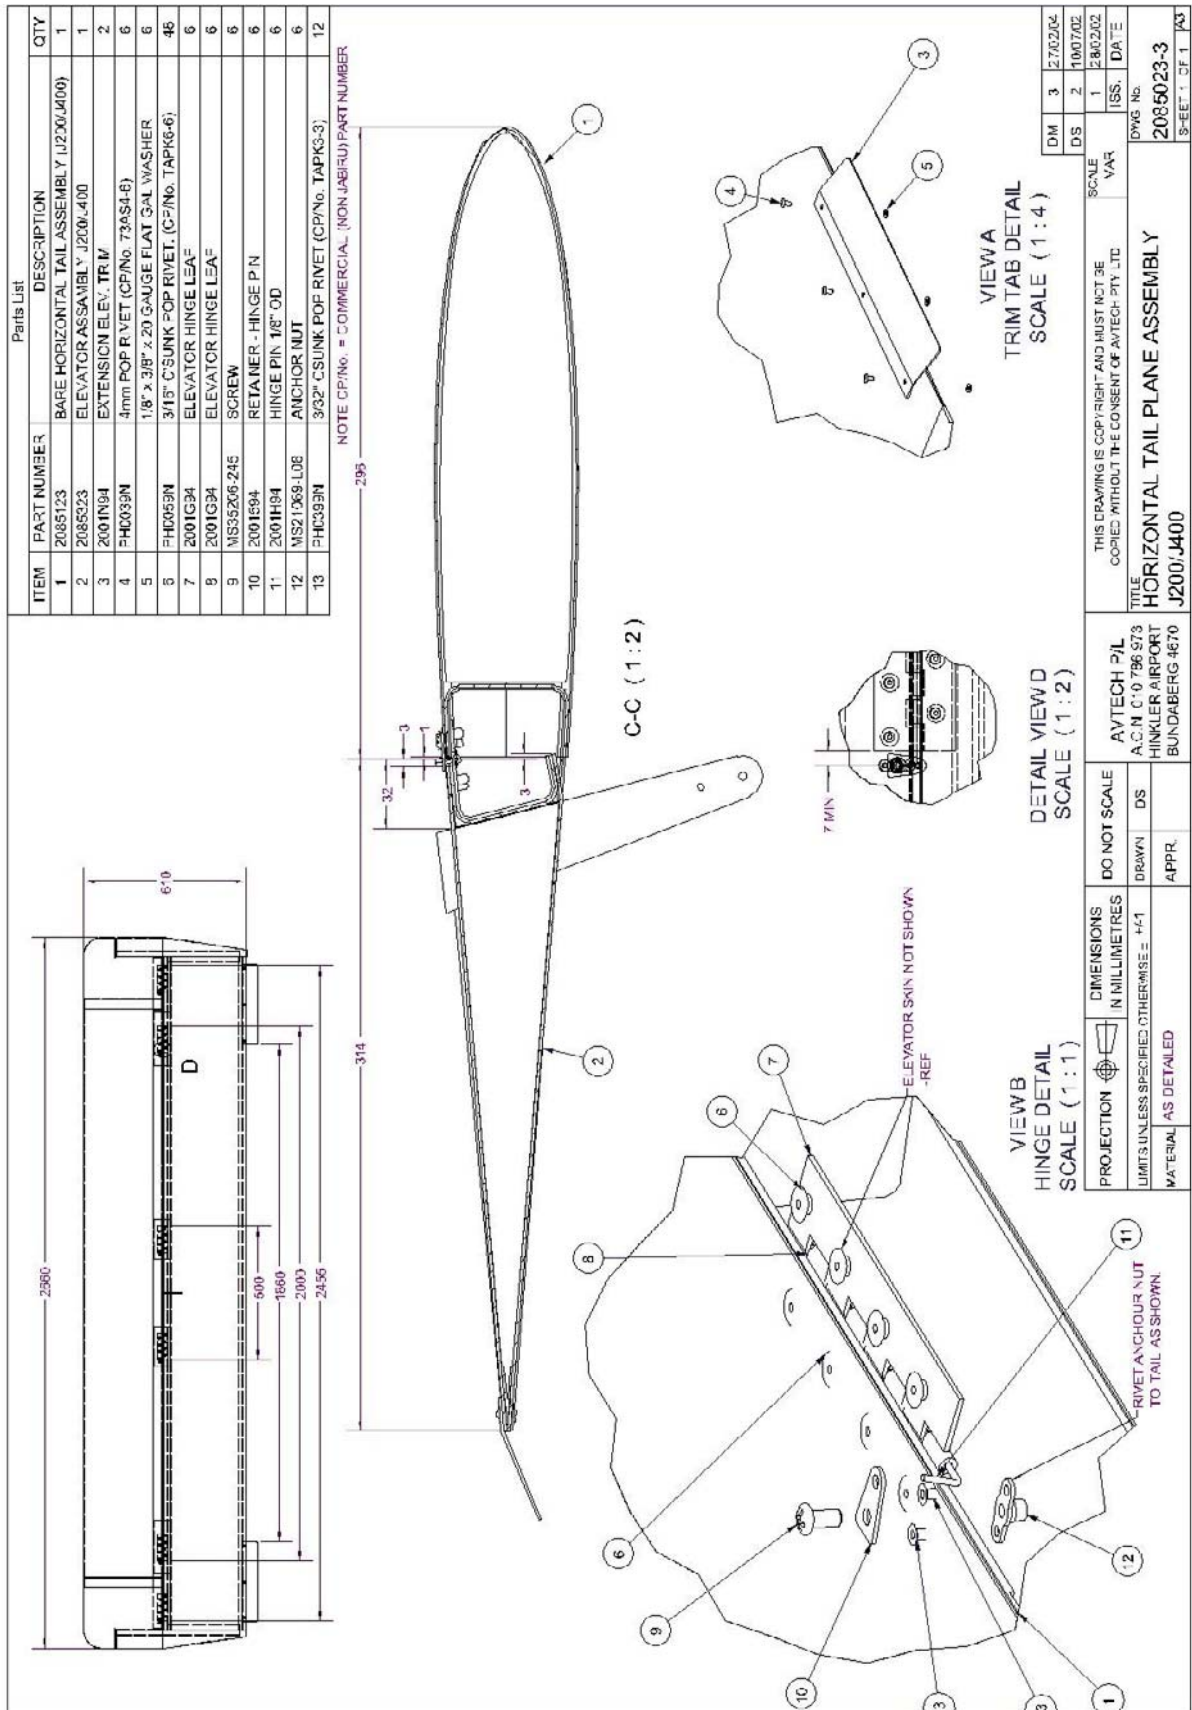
J170 Models - Horizontal Tail & Elevator Assy
